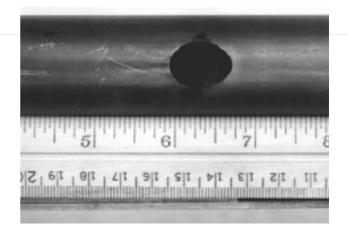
Unalloyed titanium tube perforated by pitting in hot brine.
